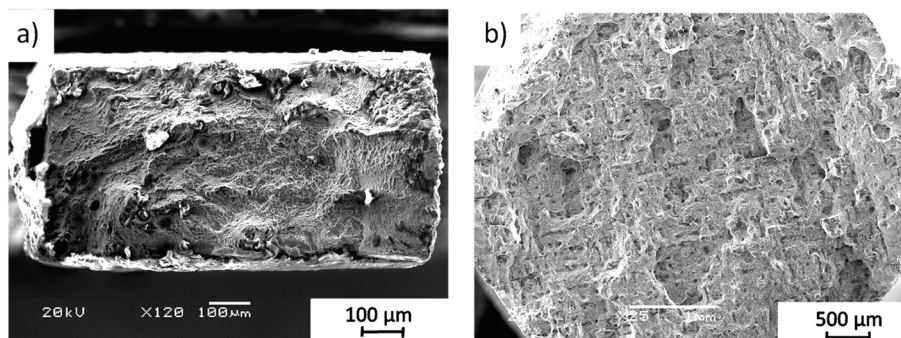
Fracture surface of a) M-TT from reduced section and b) round specimen produced by EBM
